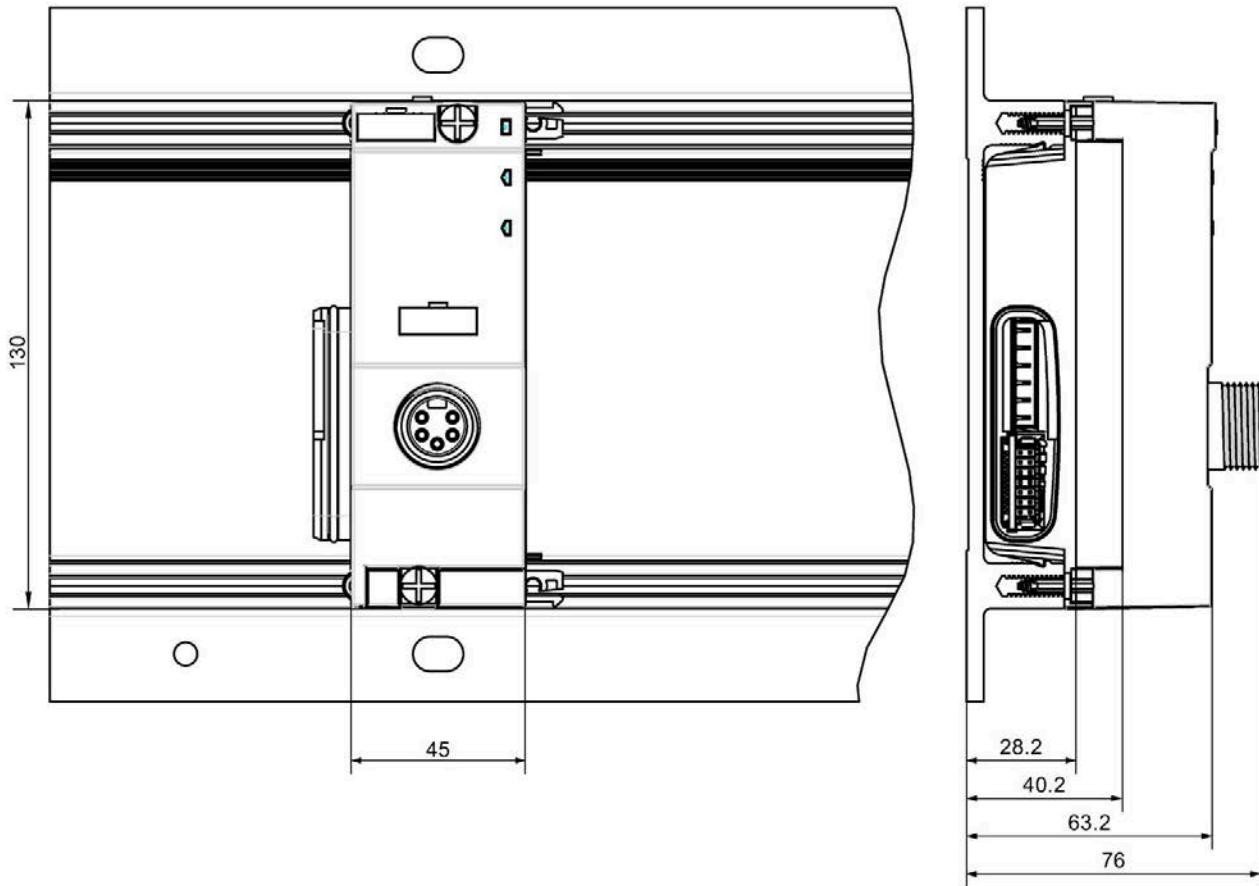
Dimensional drawing of the power module with CM PM ECOFAST connection module
